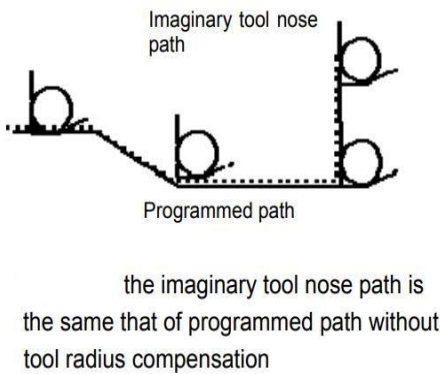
Tool trajectory when programming with hypothetical tool tips
